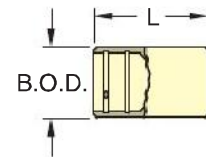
Flange Adapters (Spline x Flange 150psi)
